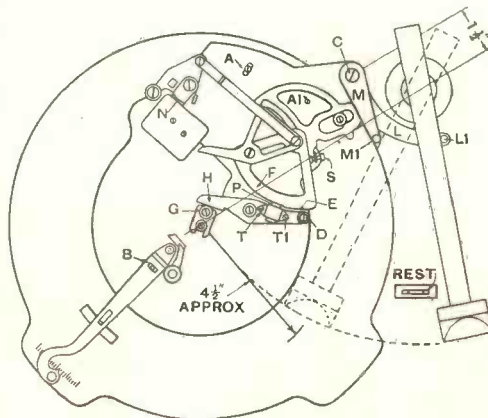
THE ESSENTIAL PARTS OF THE GRAMOPHONE MOTOR.
